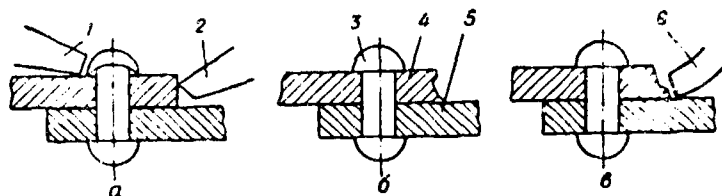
Chasing of Unscraped Edges. Tightening a defective rivet with a half-round (standard) head: 1 - calking tool for swageing the rivets; 2 - calking tool with acute angle for chasing the edges; 3 - rivet; 4 - edge of sheet with groove after chasing with calking tool 2; 5 - edge of sheathing sheet; and 6 - curved calking tool for closing the sheets' edges.
